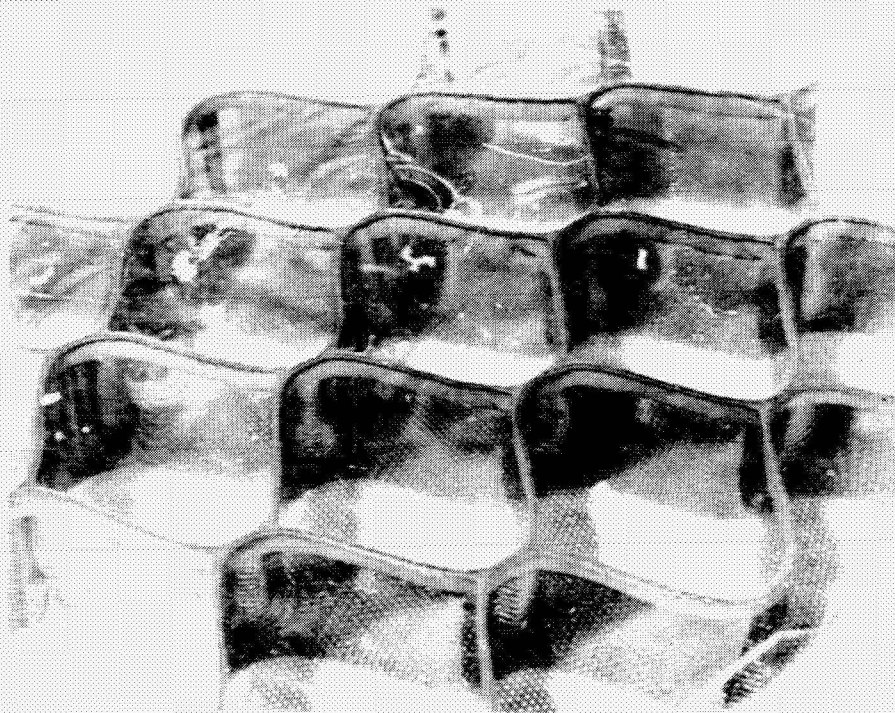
Polyimide Bonding Specimen - Facesheet Side
